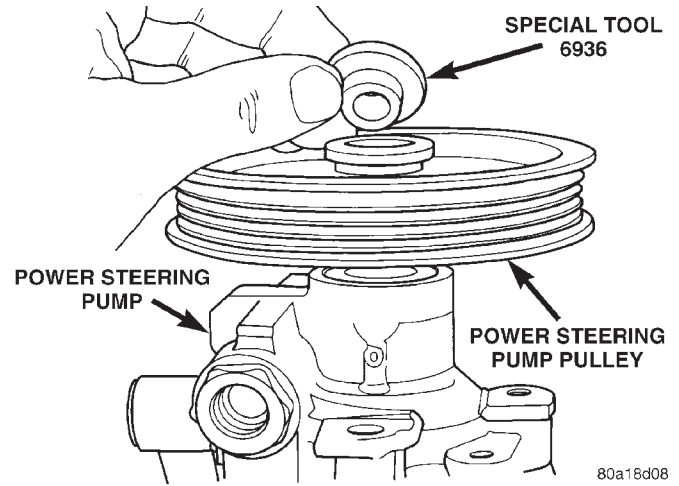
Spacer Correctly Installed On Power Steering Pump Pulley
